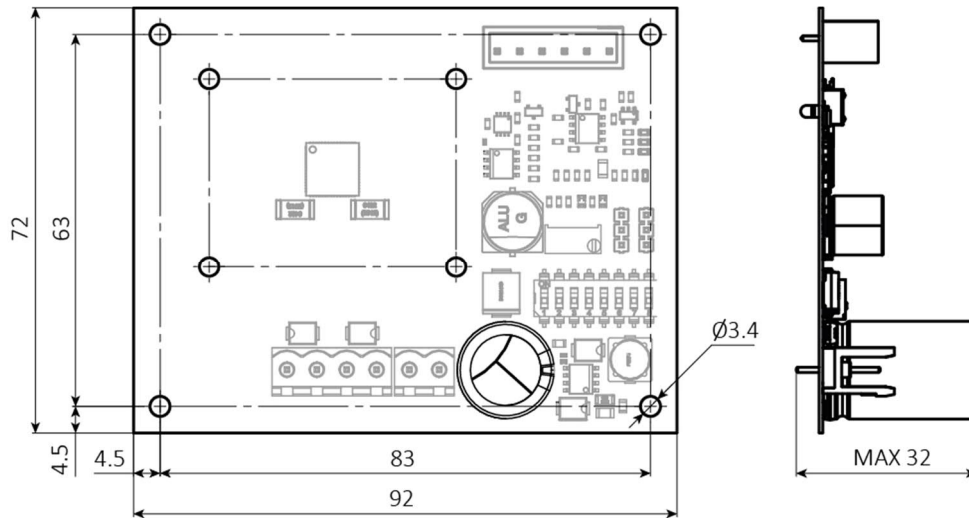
Dimensions of stepper motor driver SMD-1.6 open frame version
